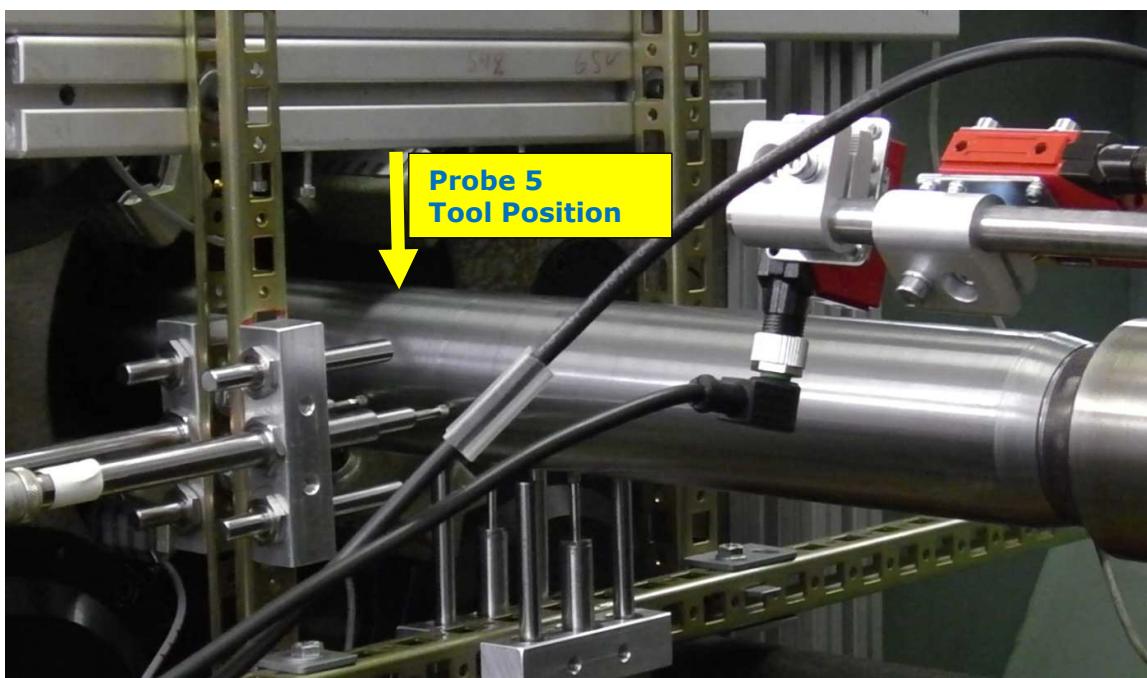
Experimental Set-Up – Workpiece Eccentricity at Tool Position
